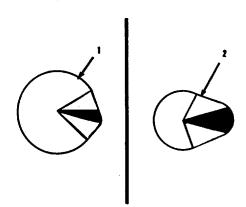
Camshaft Inspection Areas.
